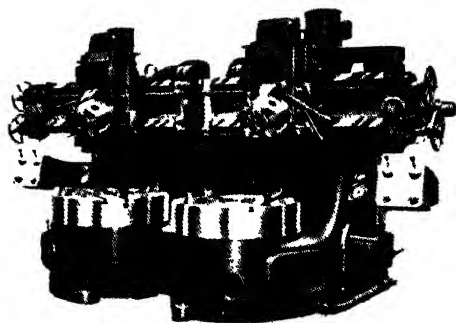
Duplex Vertical Turret Lathe or Boring Machine.
